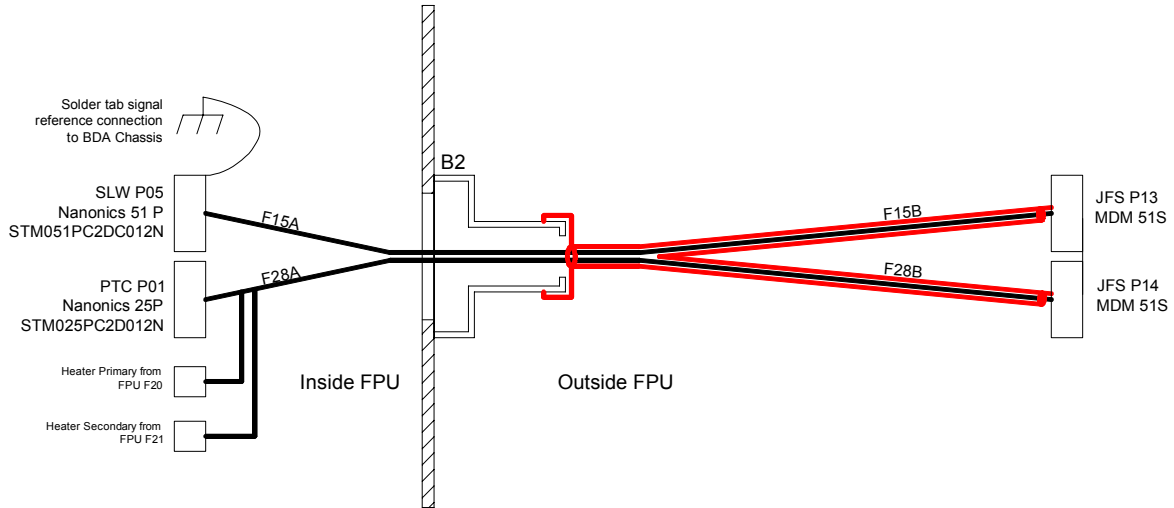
SLW BDA Harness Assembly – F15 and PTC Harness – F28
